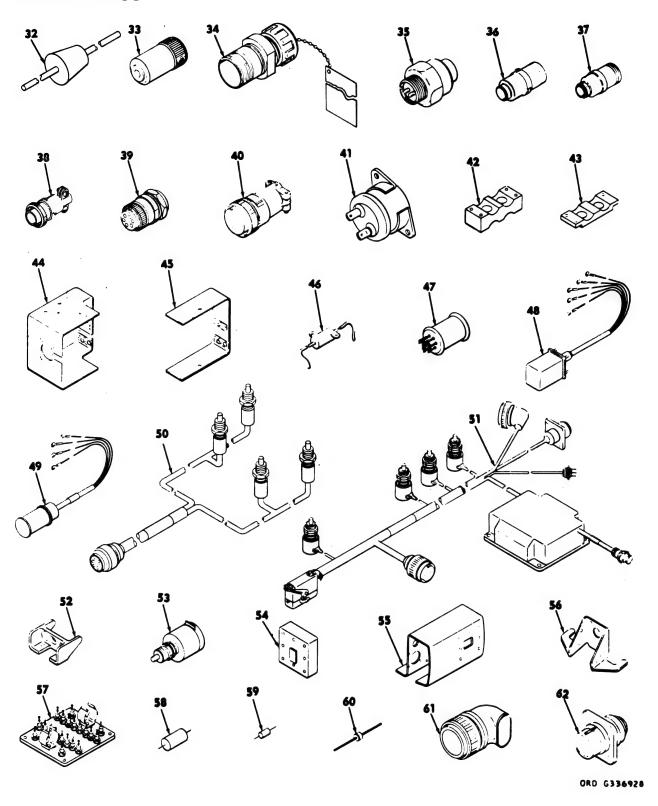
WIRING HARNESSES AND CABLE ASSEMBLIES
